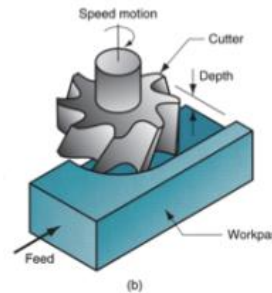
Formal definition of end milling process (picture courtesy of John Wiley & Sons Inc.)
